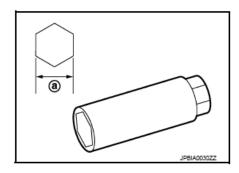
Identifying Spark Plug Tool Dimension Courtesy of NISSAN NORTH AMERICA, INC.
